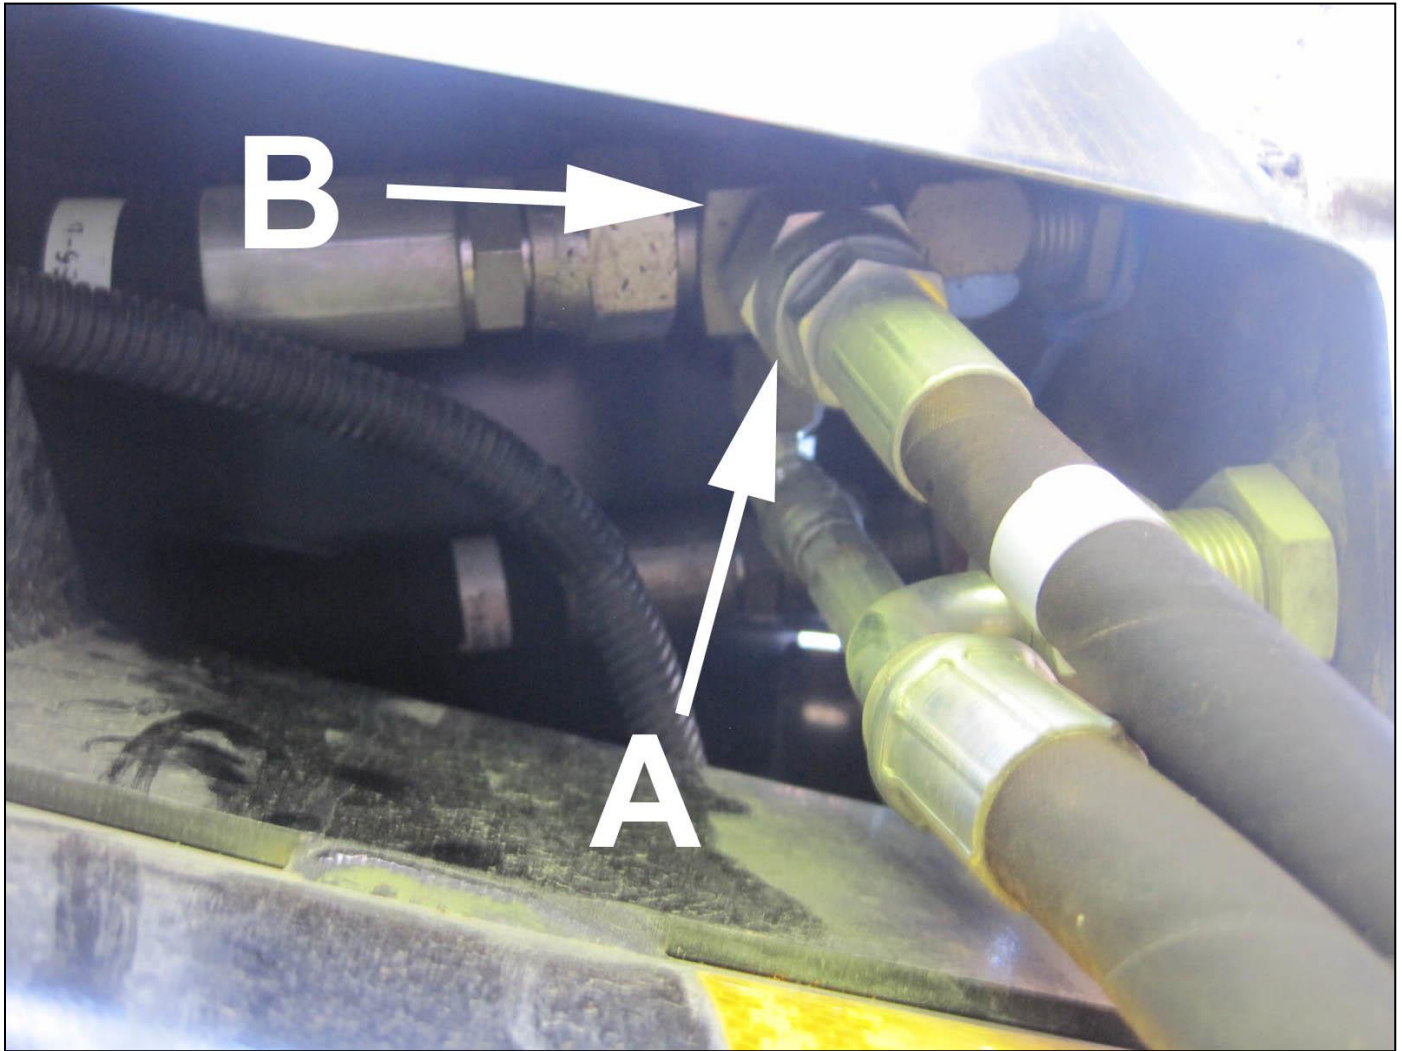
HOSE ATTACHMENT FROM BOTTOM UP
